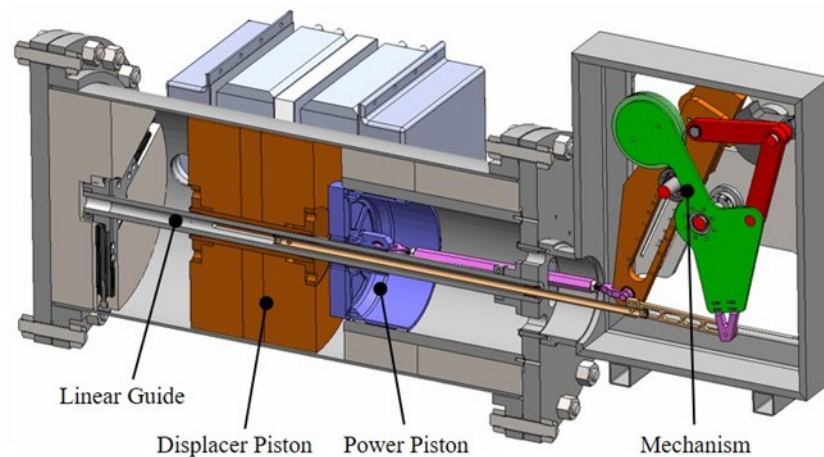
A section view along piston axis of large-scale engine, showing features inside the cylinder and crankcase.
